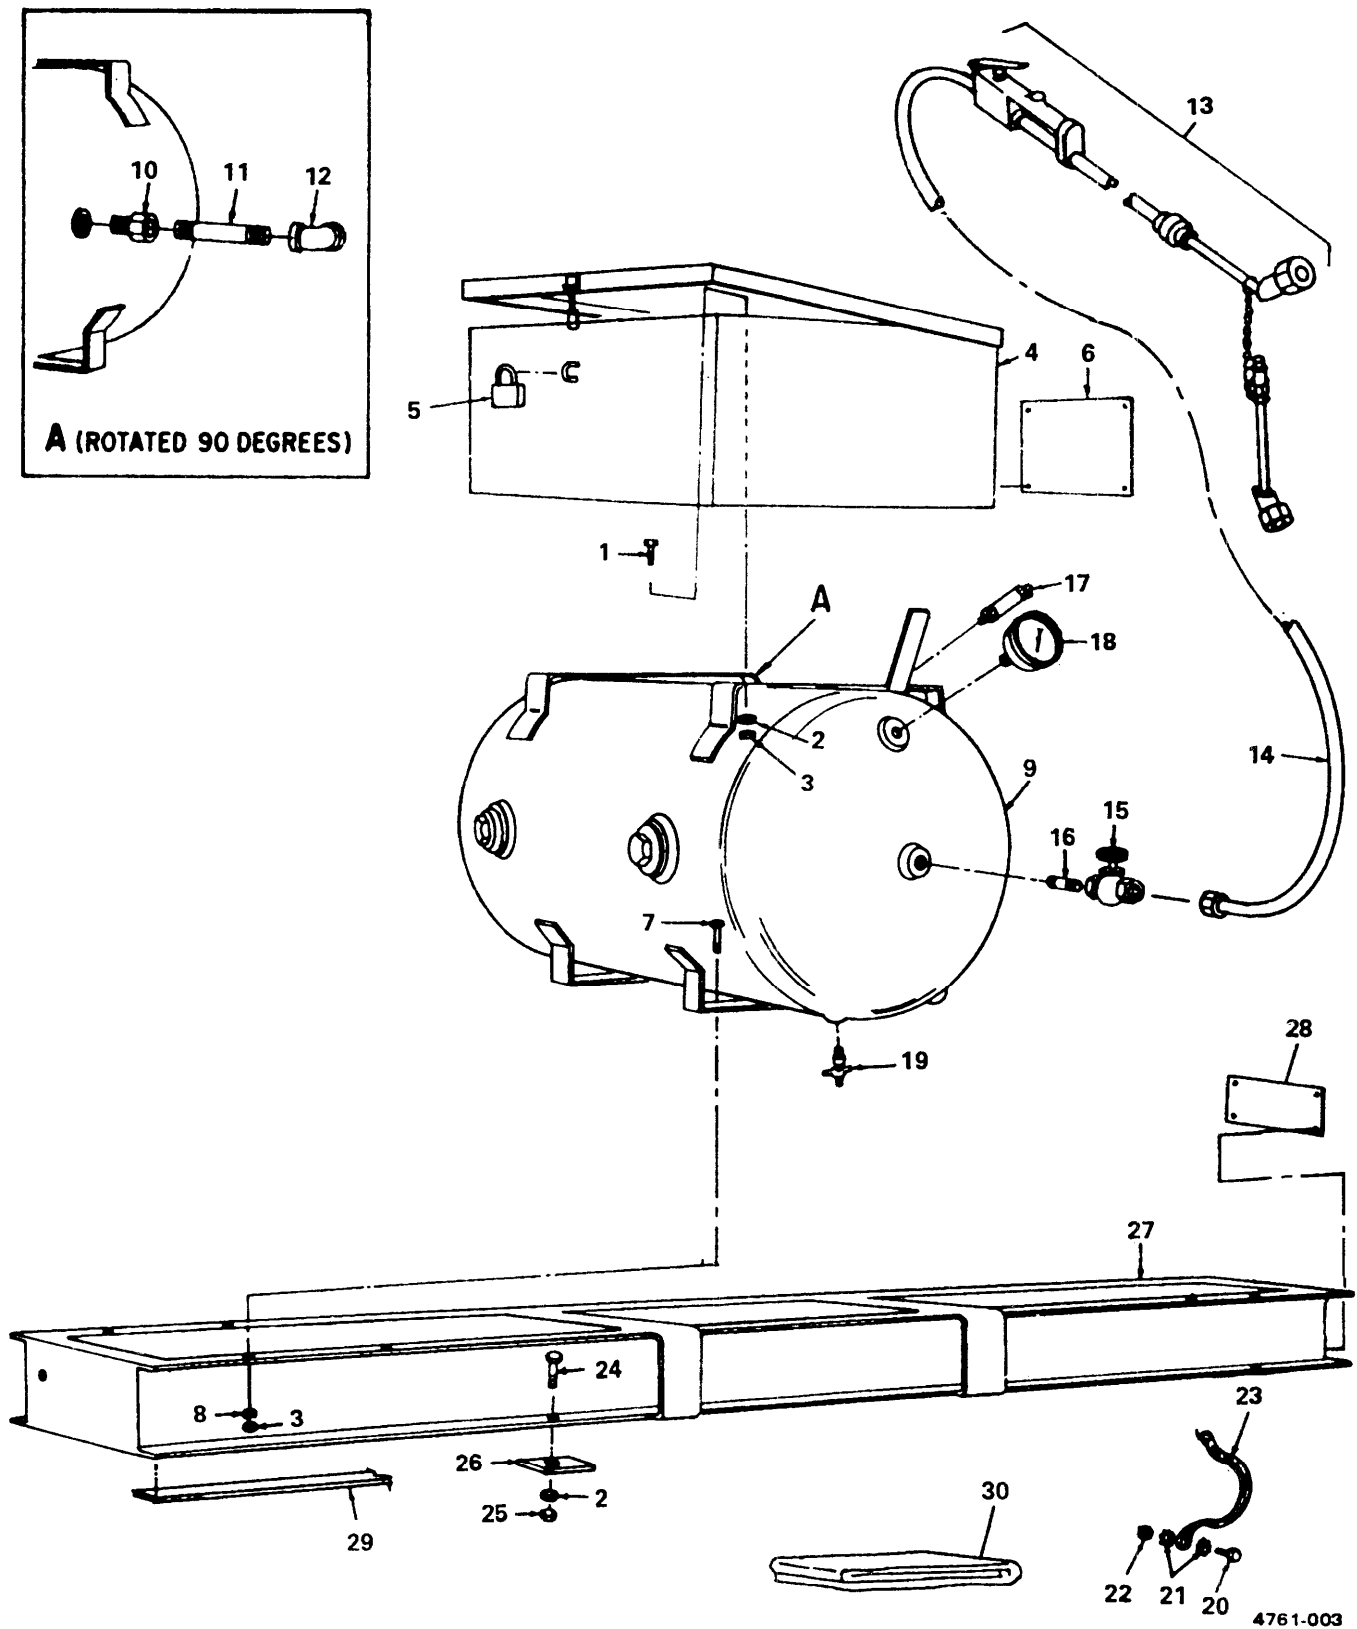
Air Tank, Tool Box, Frame and Related Parts.
